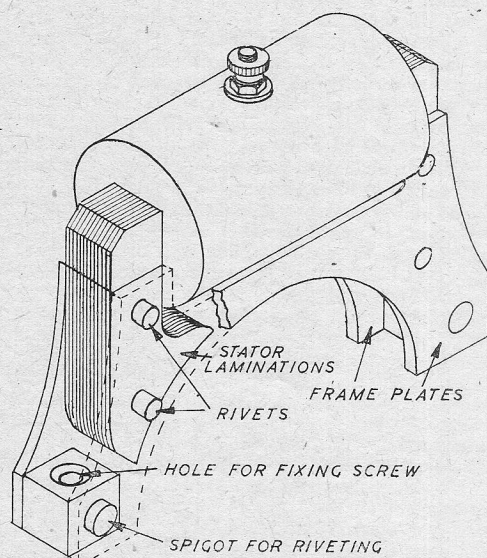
A suggested modification to the structure of the "Atomax II" magneto, using sheet-metal frame plates
